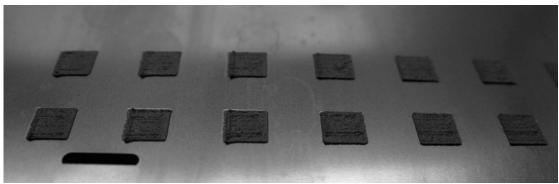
Result from manual screenprinting of solder paste on bottom side of stencil.
